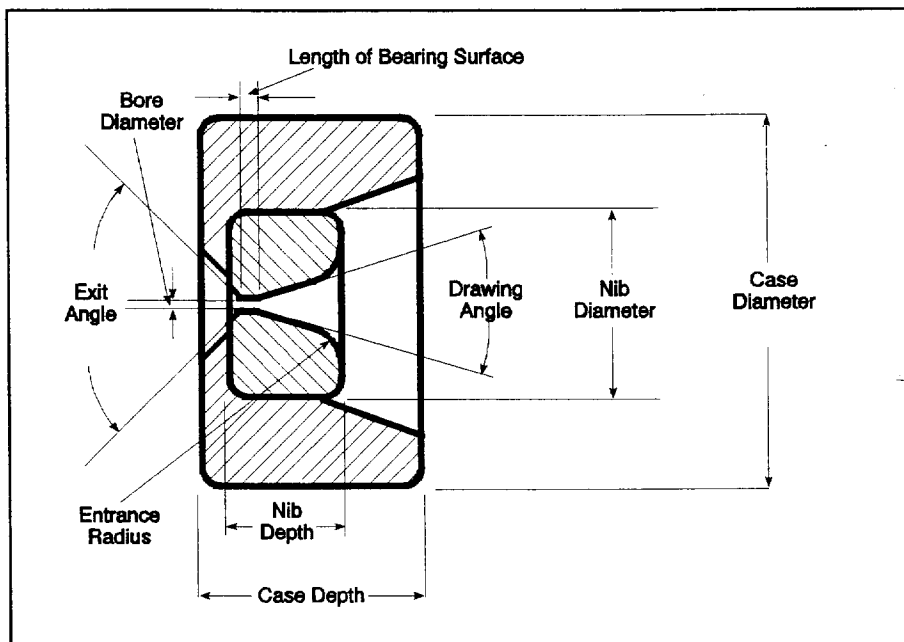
Tungsten Carbide Drawing Die Nomenclature
